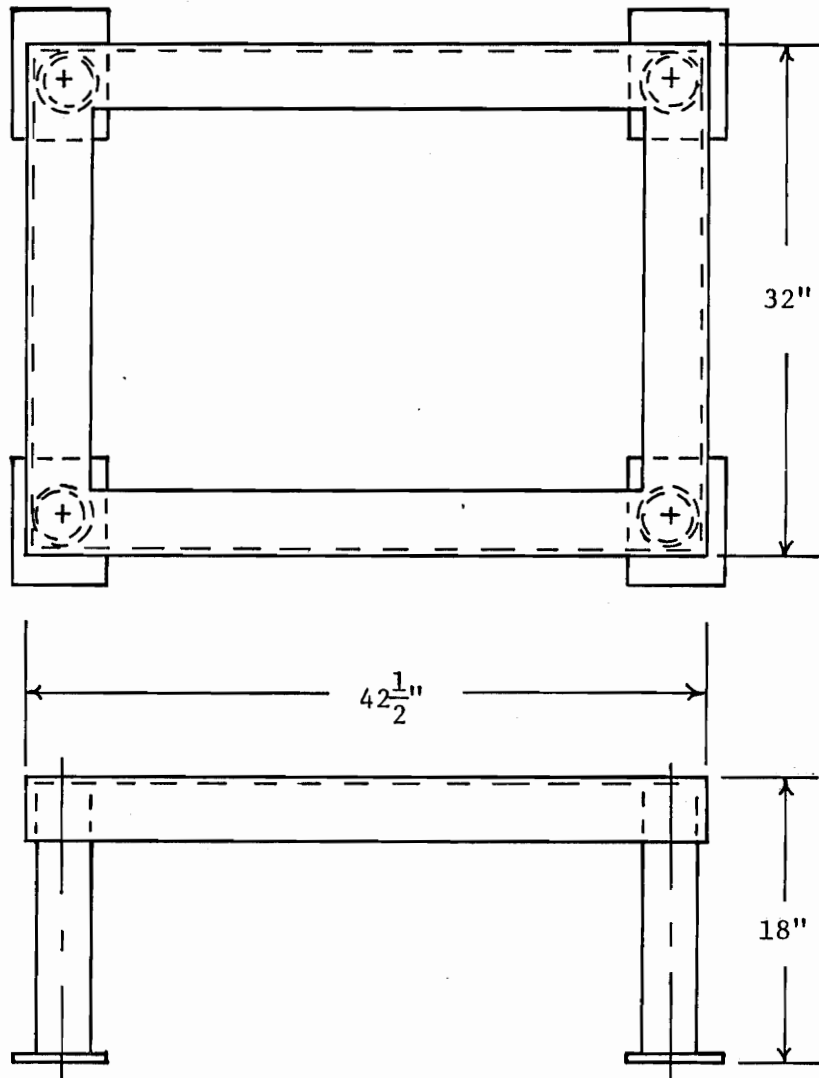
ENGINE AND COMPRESSOR SUPPORT
